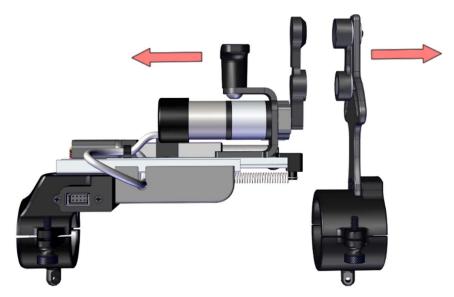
The Yoke Clamp and Yoke Collar Clamp must be pulled apart to separate the two assemblies.
